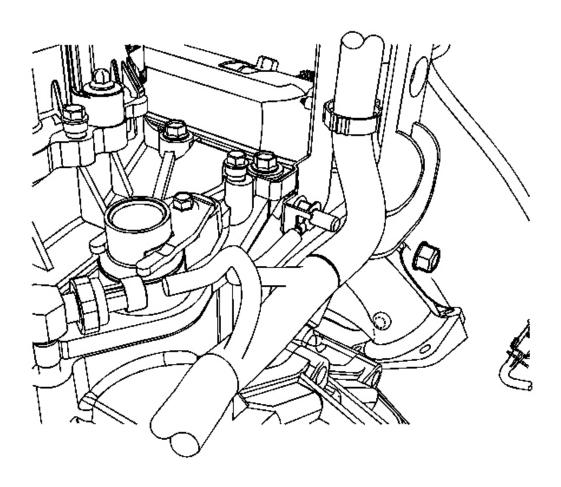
Engine Wiring Harness Ground Nut Courtesy of GENERAL MOTORS CORP.
